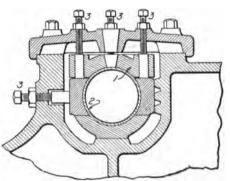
Section of Babbitt Lined, Quarter-Boxed Main Bearing
